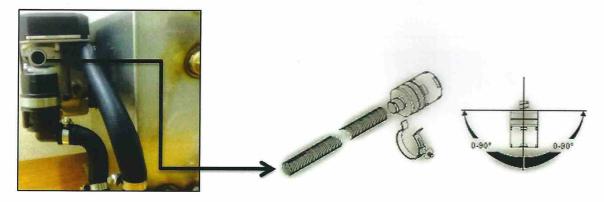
Combustion filter, tube and clamps are all supplied in the kit.
